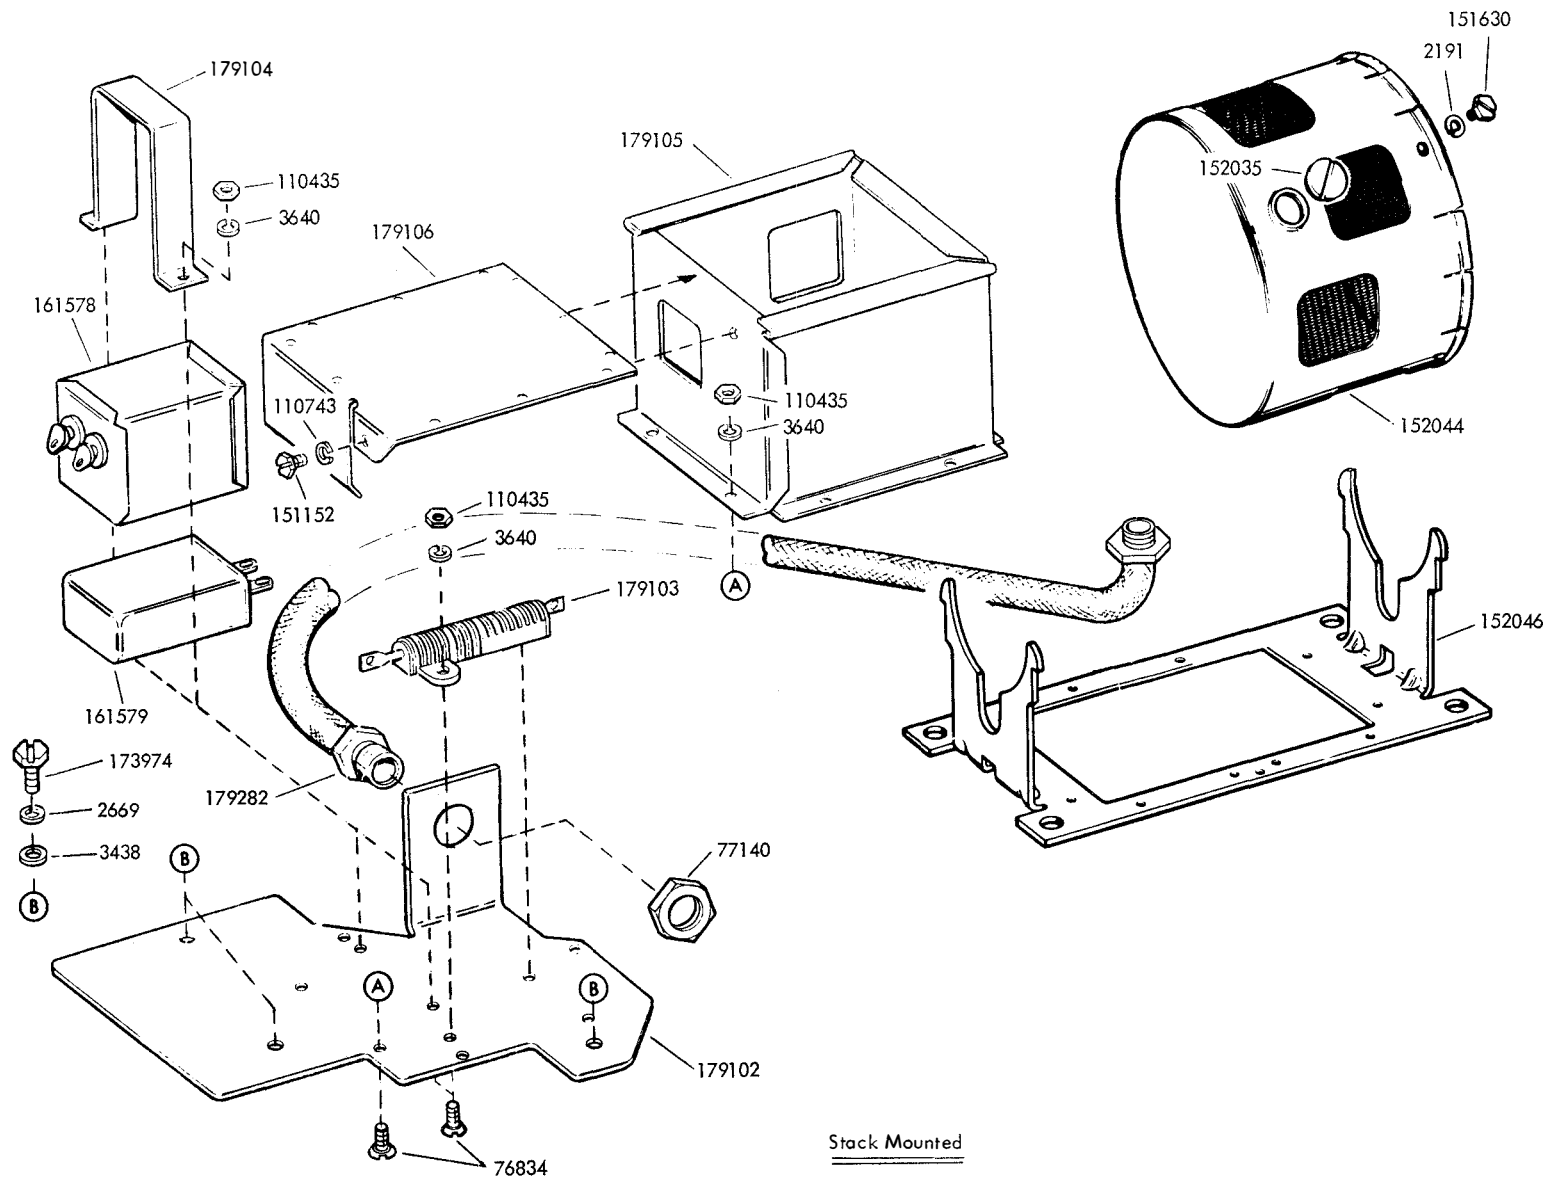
SERIES MOTOR MOUNTING PARTS
